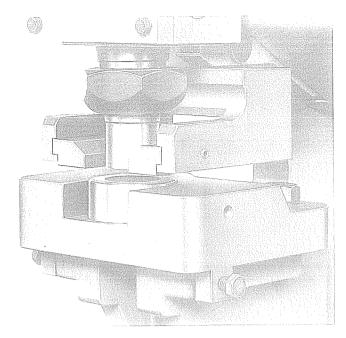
Punching equipment accommodating punches and dies within the cutting range of 30.5 to 50 mm
